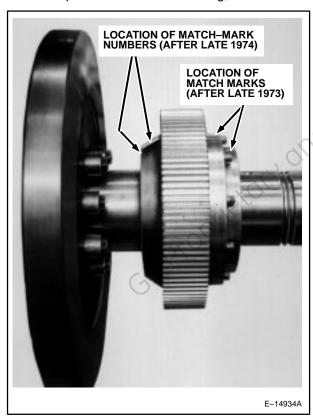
Pump Drive Gear Assembly Match–Mark Number Locations.
